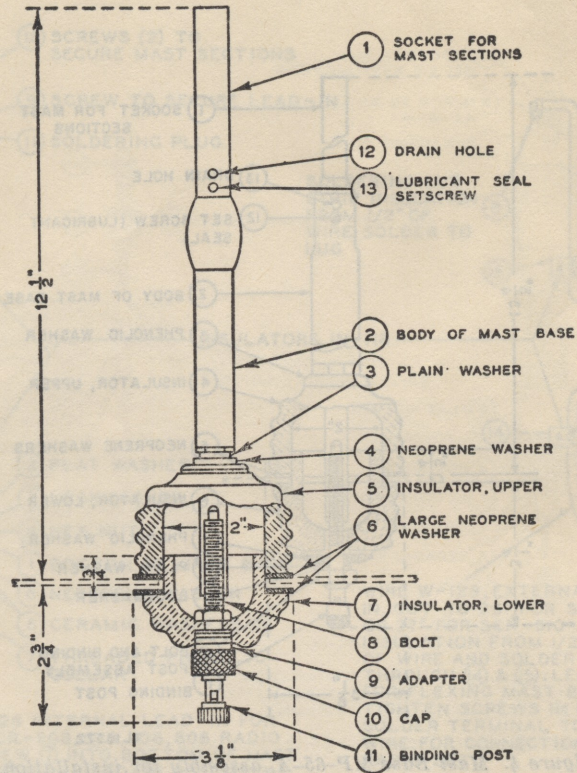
Mast Base MP-48-A, assembly with Wire W-128 lead-in.
